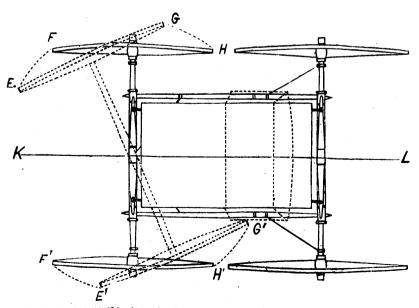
PLAN (Half-Inch to the Foot) OF OPEN BUQGY SHOWN IN FIG. 1.
